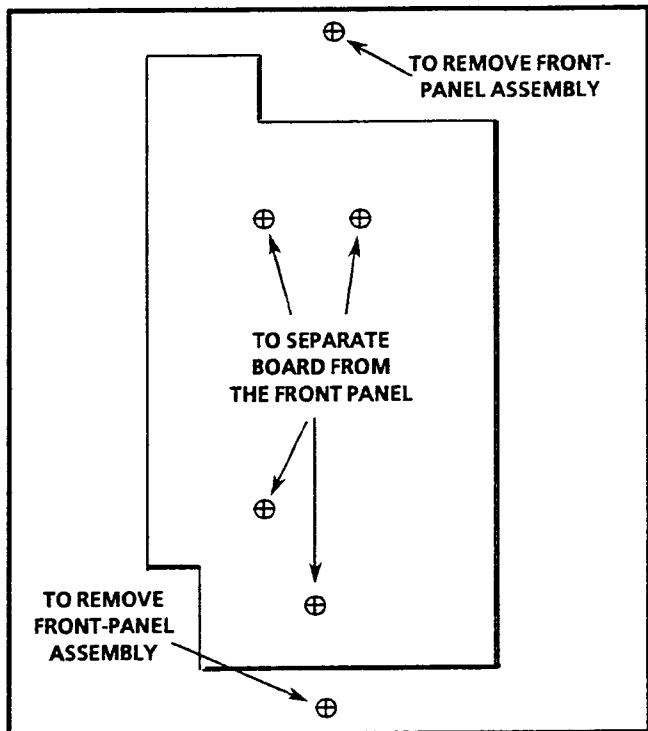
Screws that hold the Front Panel board (A2) in place.
